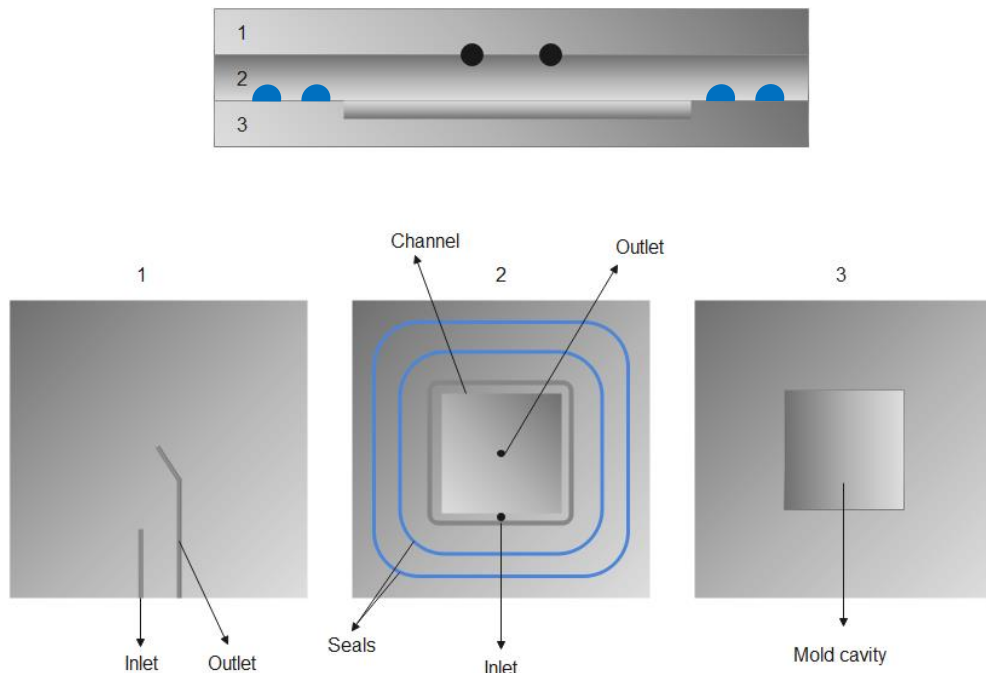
Configuration of TP-RTM square plate mold for peripheral injection strategy. (2) upper mold (3) lower mold.
